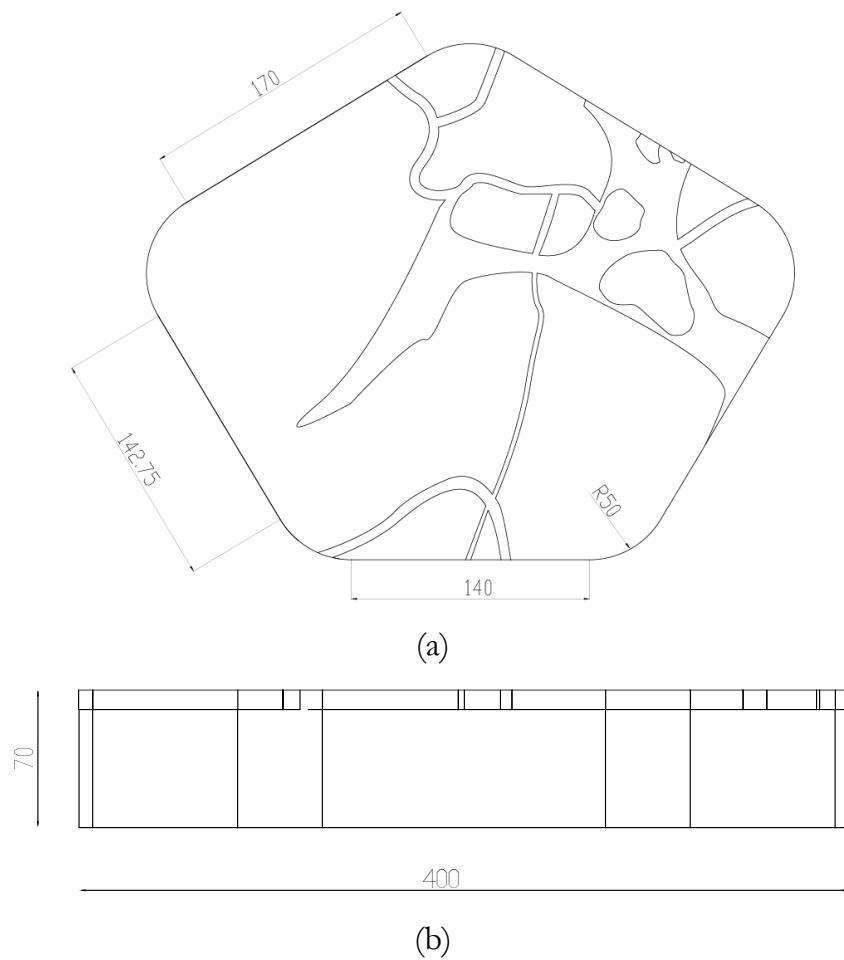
Panel type 1. Measurements in mm. (a) Top view. (b) Front view.
